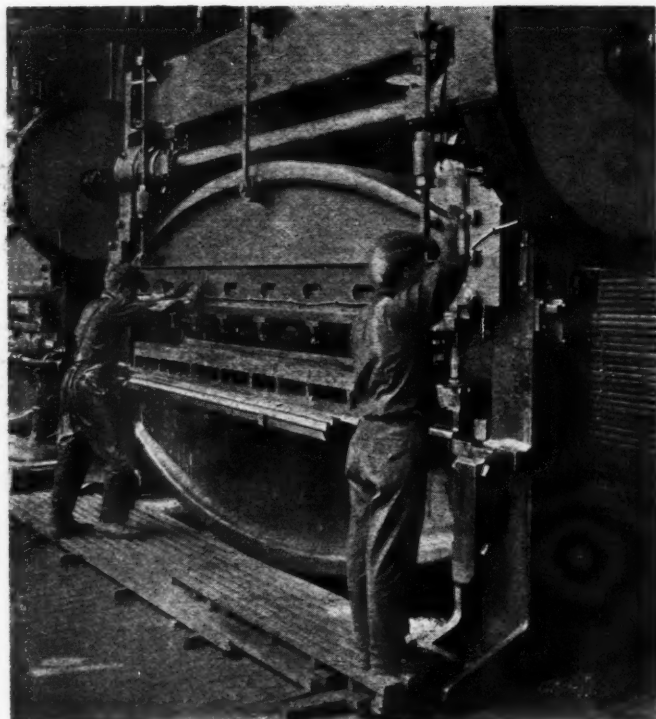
Electric release on rail piercing press. All hands, front and rear of press, must be on buttons before operator can tip the press. A light shows in front of the operator as circuit is completed
